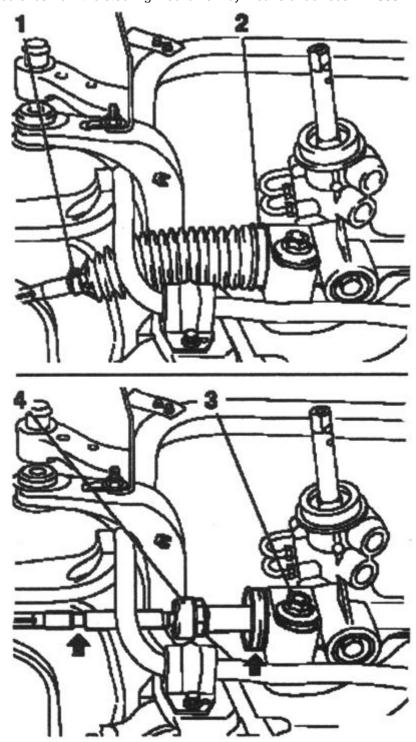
Withdrawal steering rods: 1,2 - Fixing brackets, 3 - nut, 4 - tie rod ends
